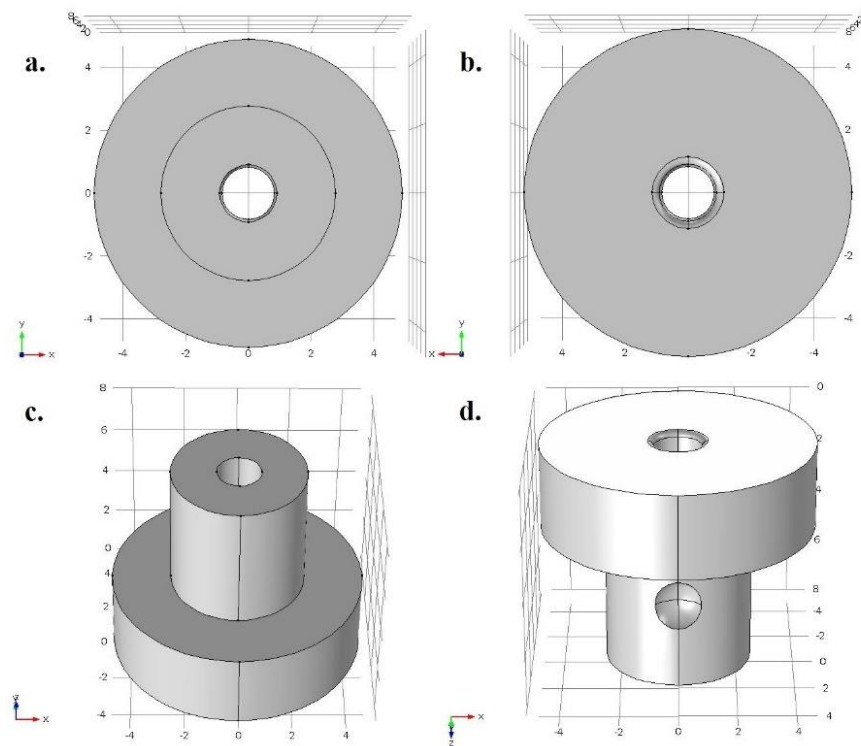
Schematic illustrations of top and bottom views of piston lower end type 3, (a. top view, b. bottom view, c. top inclined view, d. bottom inclined view)
